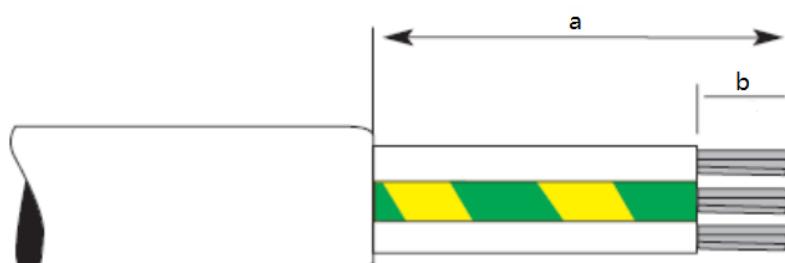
CABLE / AMP / TERMINAL SELECTION –
